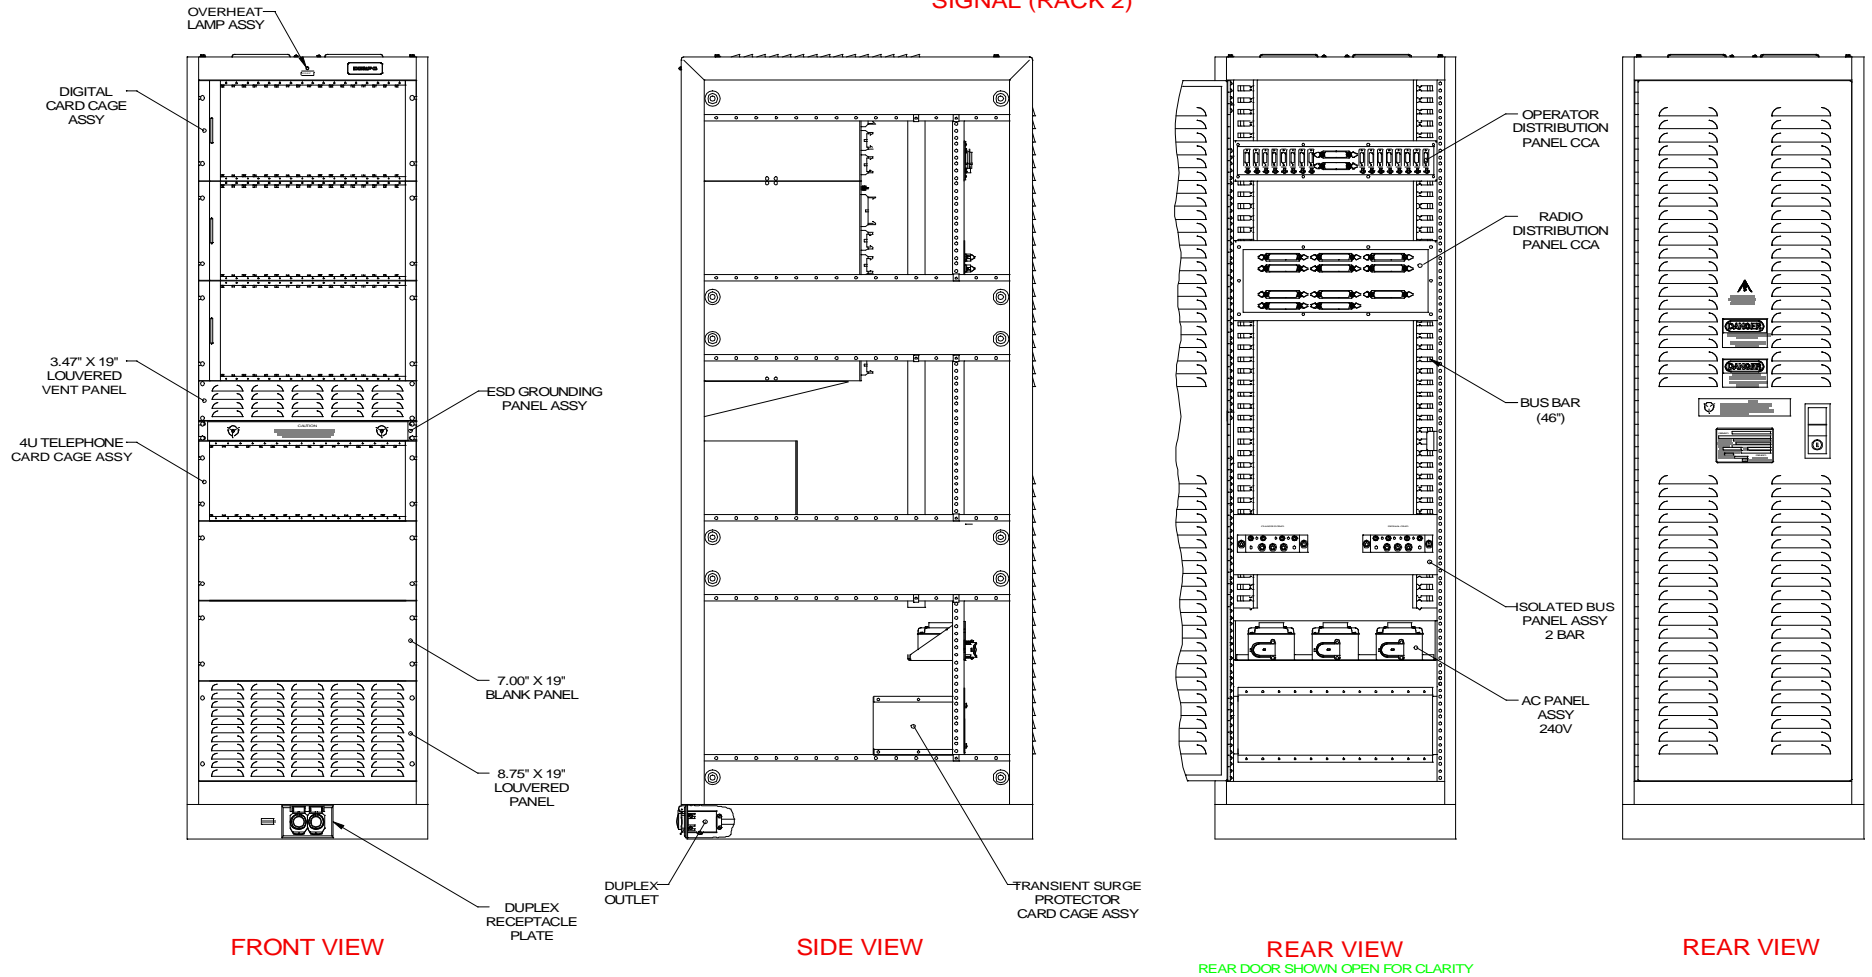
Basic ETVS System 1 (BS-1); Racks 1 and 2; Front, Side, and Rear Views (Sheet 2 of 2)
